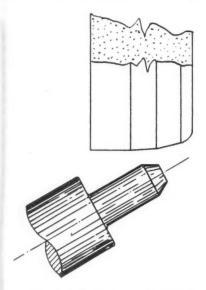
Drawing showing a profile which has been dressed into a wide-faced wheel.
